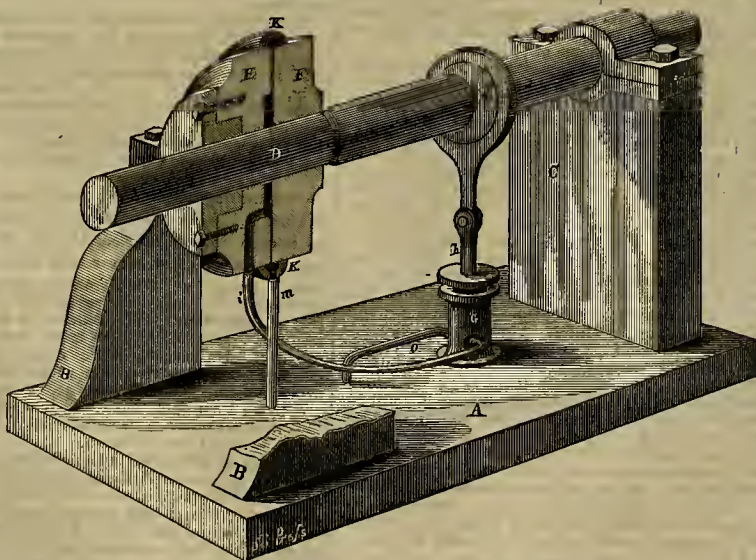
HYDRAULIC BEARING FOR PROPELLER SHAFTS.
